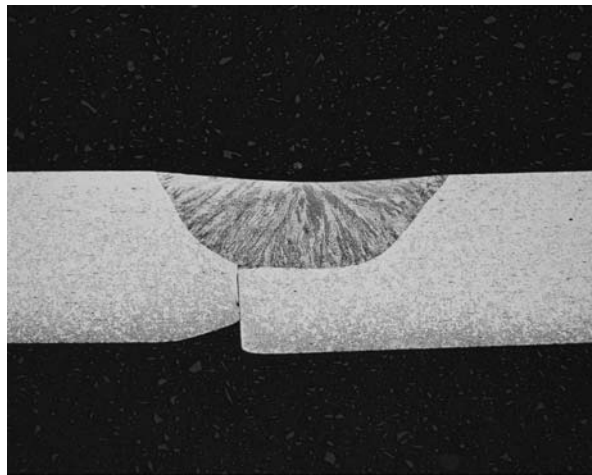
Cross section of IN625, welded in Argon, HPDL 1 kW, 1200 mm/min
